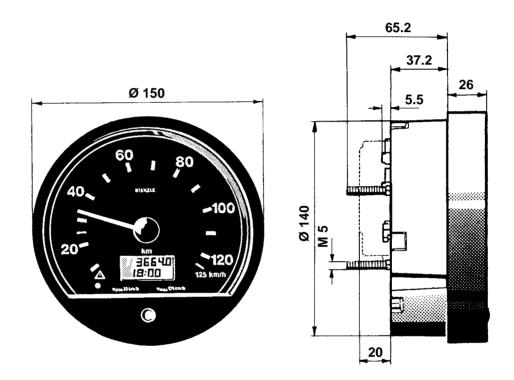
Electronic Speedometer 1323: Housing dimensions
